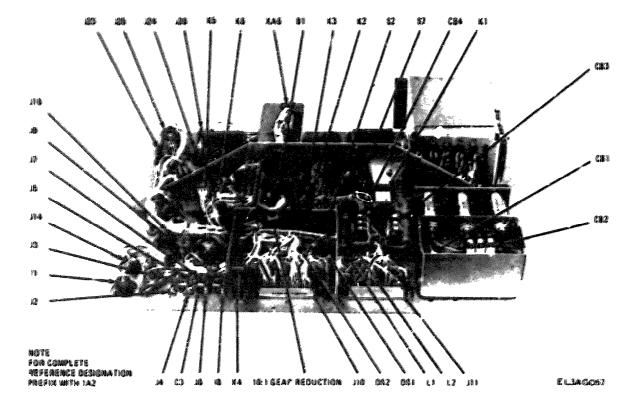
Test Set Subassembly Mx-8638A/APS-94D, Unit 1A2, rear chassis top view, parts location.
